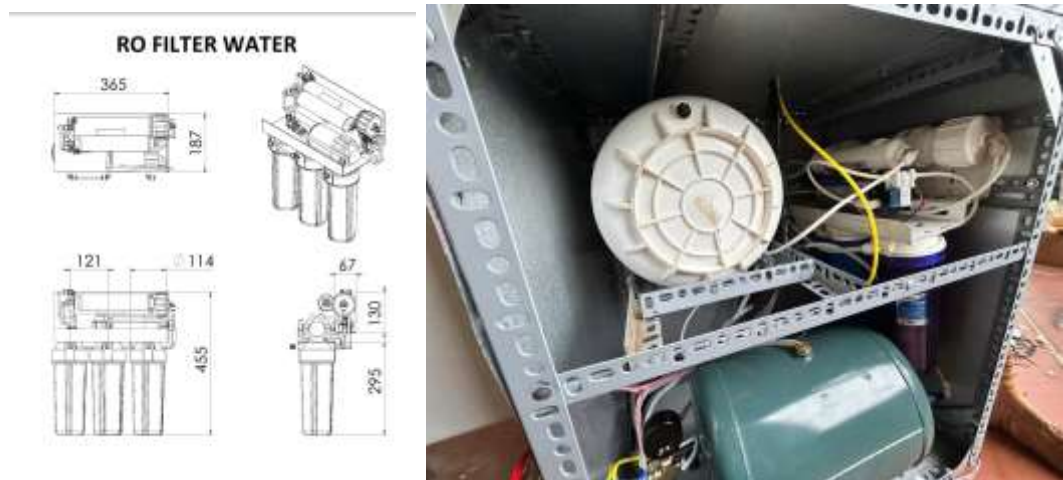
Detail drawing (left) and actual assembly (right) of the RO water filter
